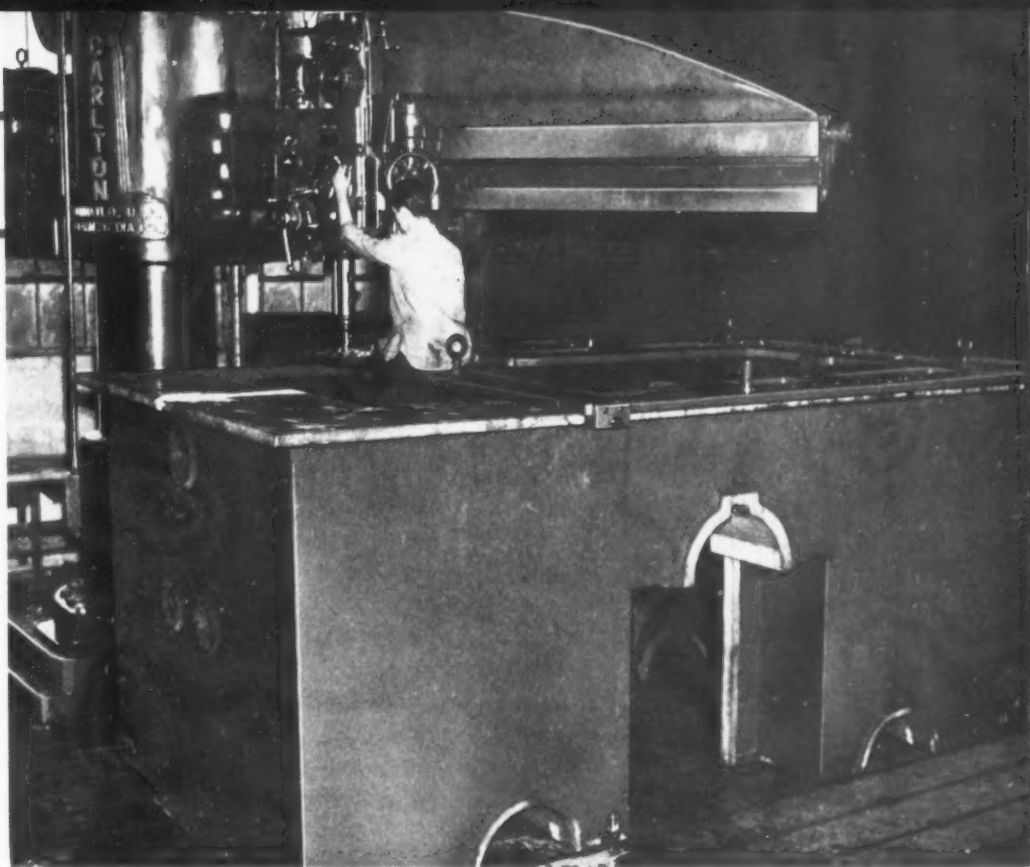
Welding Positioner Speedily and Accurately Locates High-pressure Turbine Cylinder Base in Any Position Necessary for Drilling Holes at the Various Angles Required
